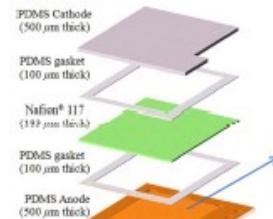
Exploded view of μ MFC assembly (Siu, et al. 2008).
